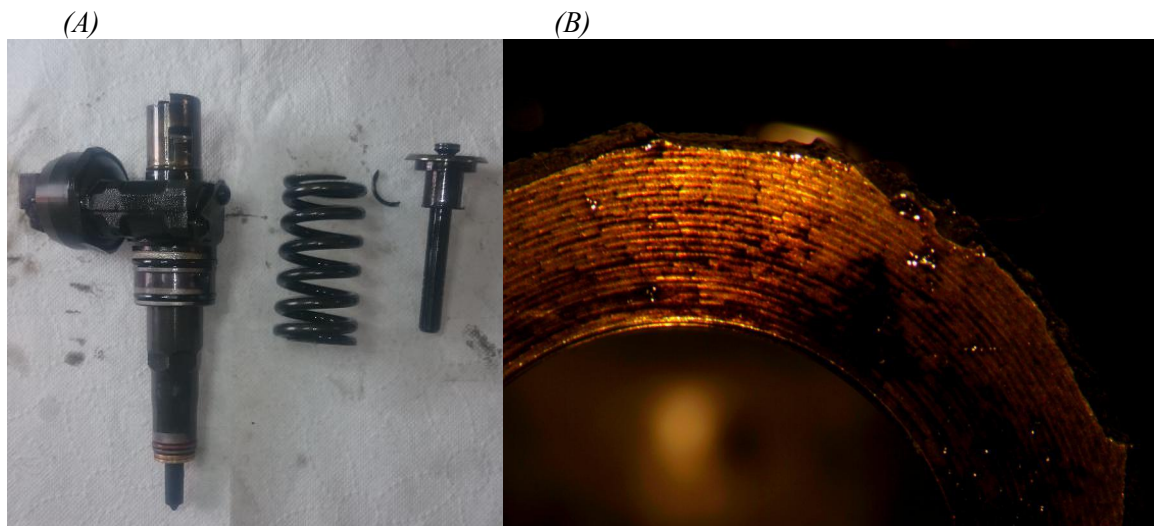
Fuel unit injector element being very often damaged: A) a general view of the damaged fuel unit injector, B) a place where a metal plate under the spring chipped off
